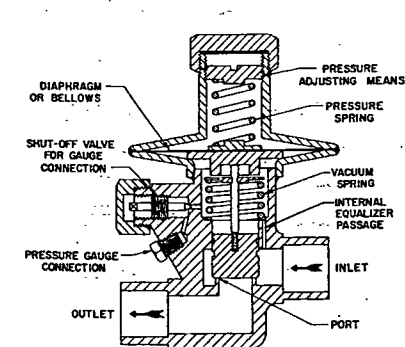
Direct-Acting Evaporator Pressure Regulator
